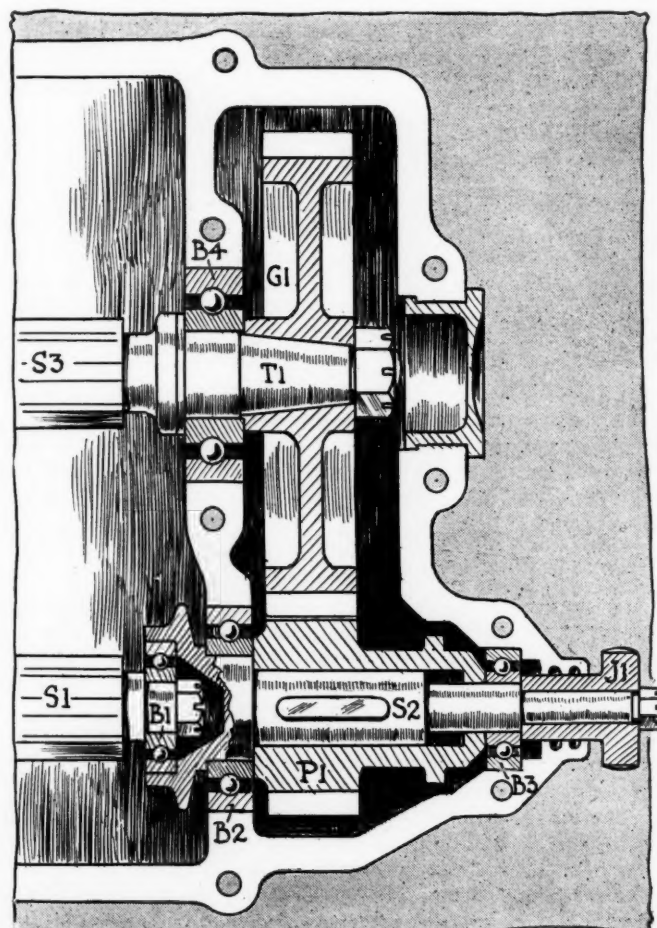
Part section of Delahaye transmission gear, showing how the shafts rotate, details of design and fitting of relating members
